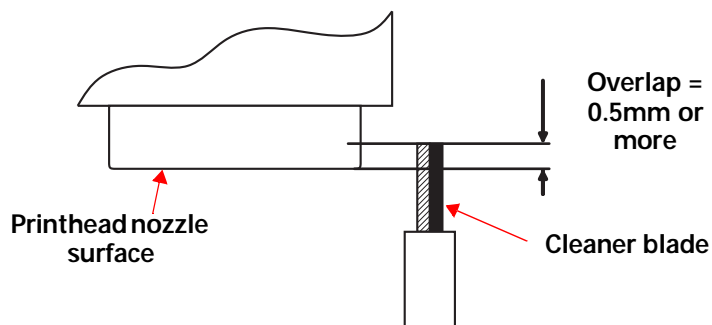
Overlap of Head Surface and Cleaner Blade
